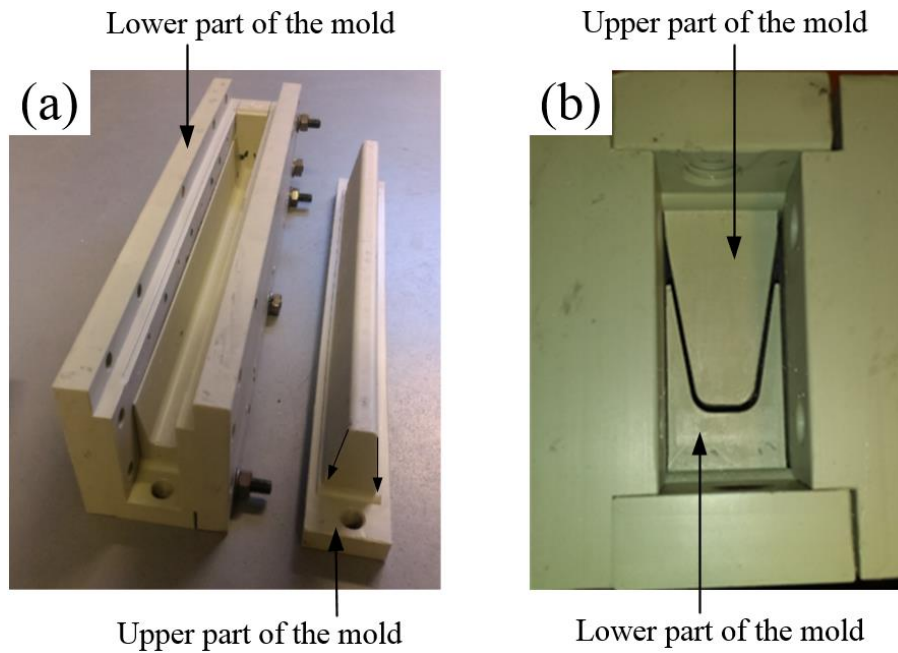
(a) The lower and upper parts of the peel stopper polypropylene mould and (b) side view of the assembled mould showing the peel stopper shape
